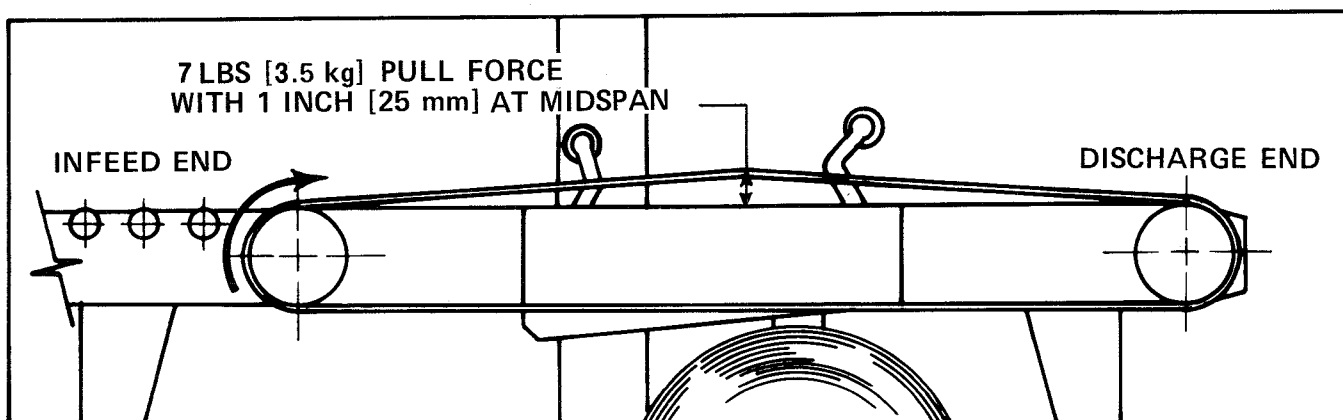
BOX DRIVE BELT TENSION ADJUSTMENT
